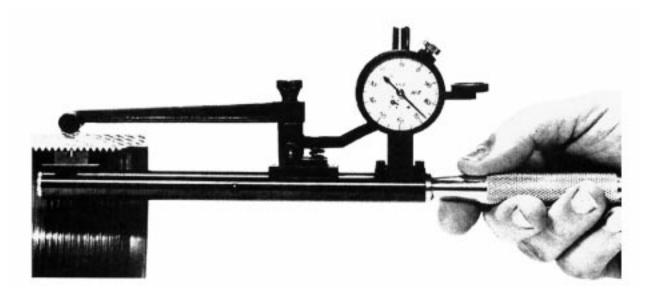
Thread Height Gauge for Internal Threads 3-in. OD and Smaller (Continuous-Dial Type)
